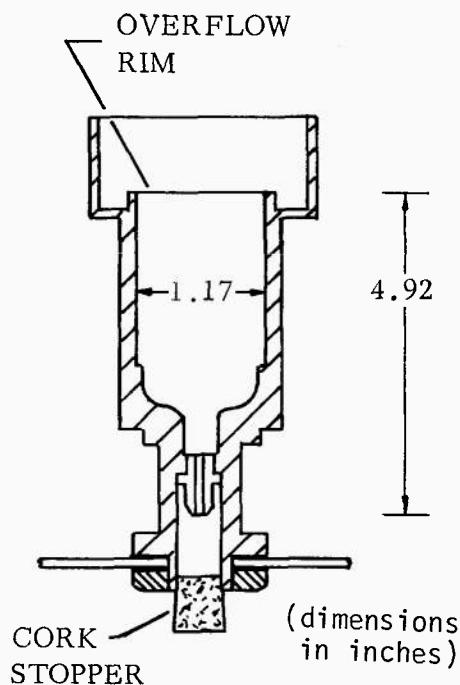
Cross-sectional View of a Saybolt Viscometer
